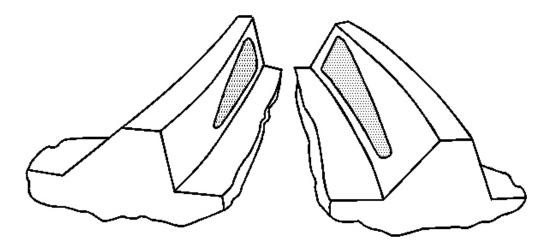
Identifying Drive Side Toe - Coast Side Toe Contact Pattern Courtesy of GENERAL MOTORS CORP.
